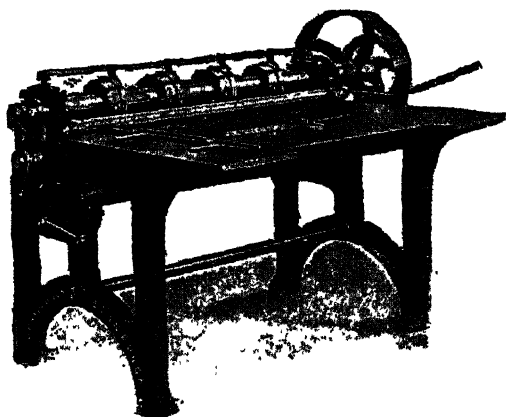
"SMYTH" SHEET-GLUING MACHINE.
